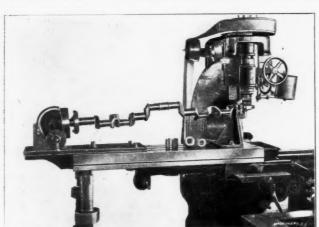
A Vertical Milling Machine set up for Milling the Tapered Square Drive on the Crank-shaft
